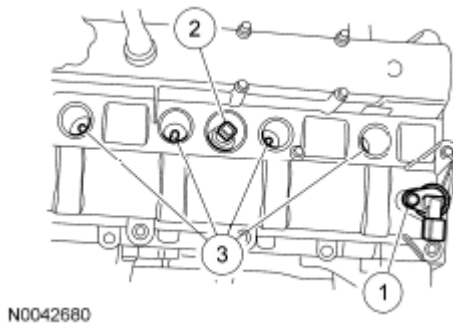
Identifying Crankshaft Position Sensor, Cylinder Head Temperature Sensor And Spark Plugs
